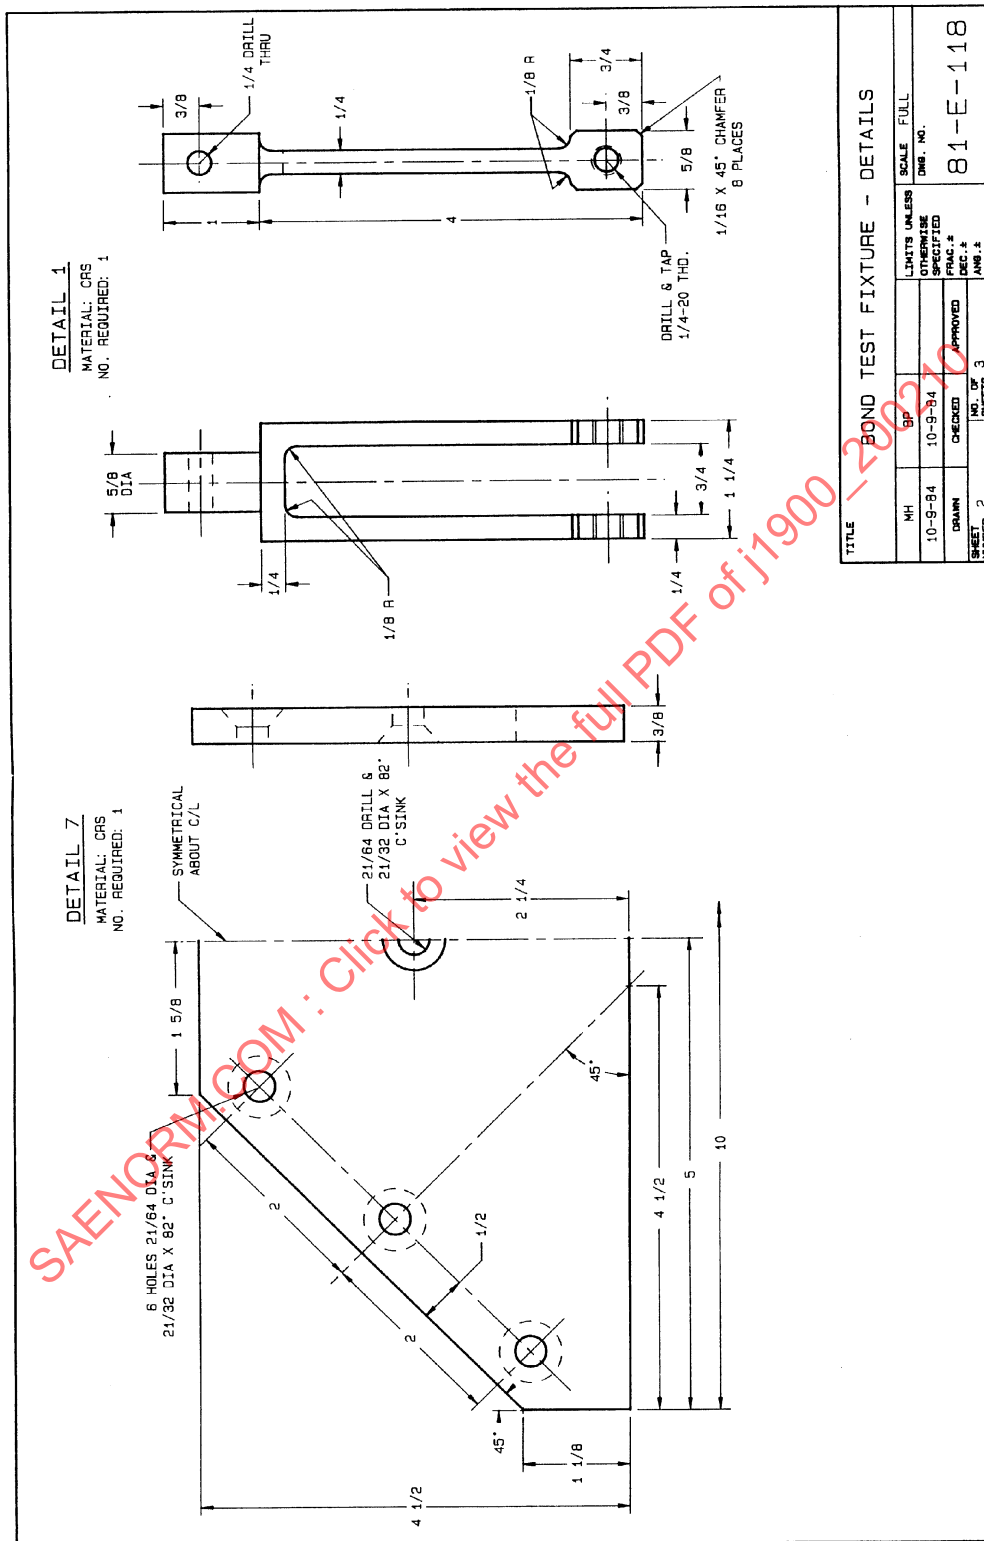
UNIVERSAL LOWER FIXTURE AND MECHANICAL UPPER FIXTURE DRAWINGS (CONTINUED)
